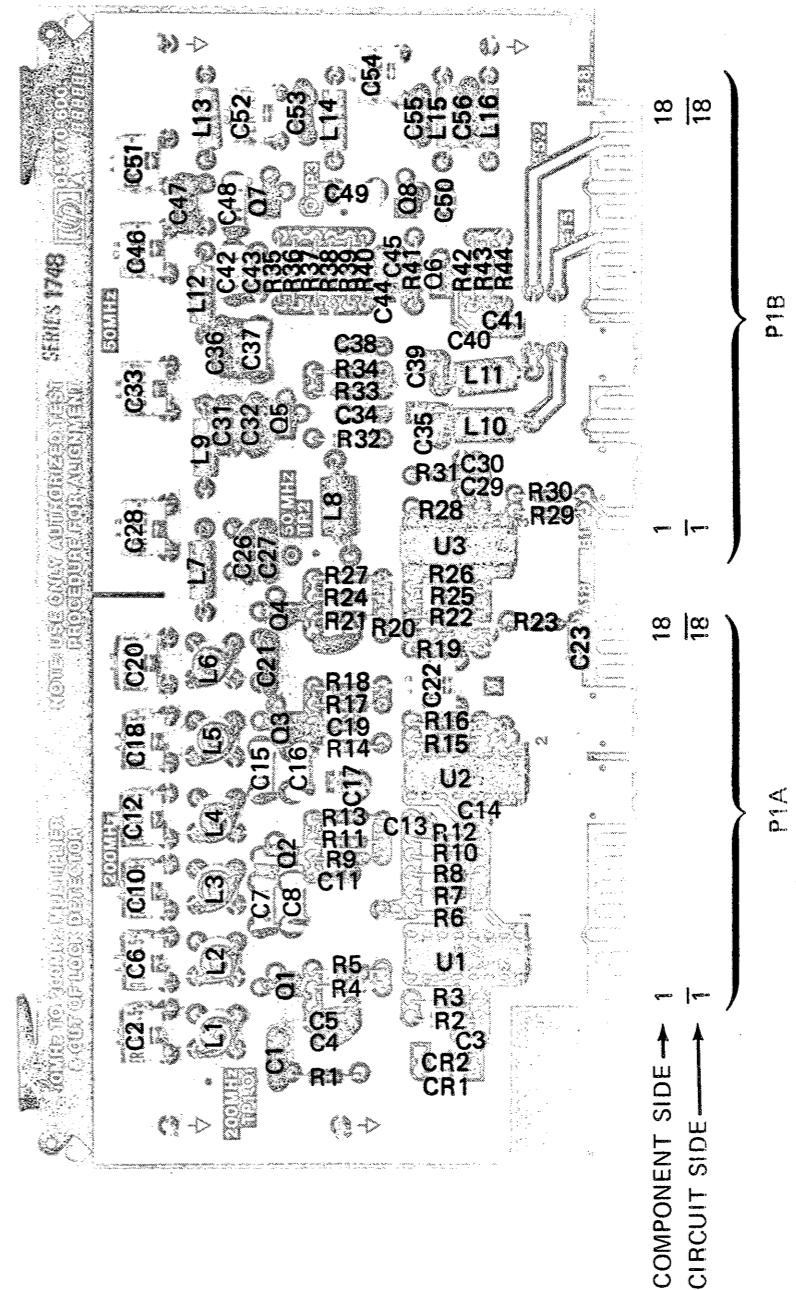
A19 Start Interpolator Assembly, A20 Stop Interpolator Assembly
